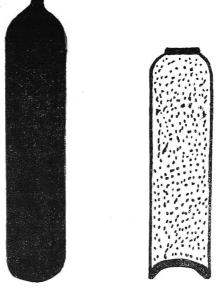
Cross-section view of cylinders. left: oxygen right: acetylene.
